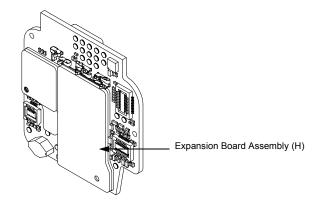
Expansion Board Assembly NOTE: There are no serviceable components on the Expansion Board Assembly.
